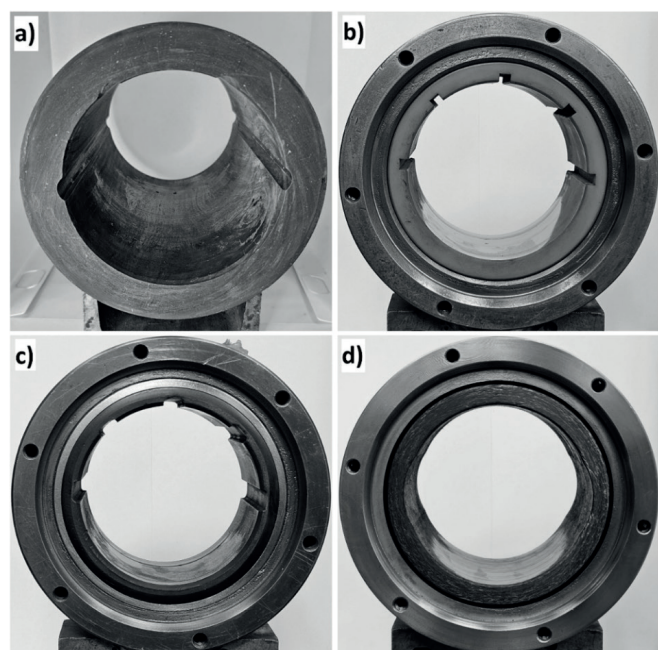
Tested bearing bushes: a) lignum vitae bush dismounted from the steel housing, b) elastic polymer, b) three-layer, c) fibre-reinforced composite
